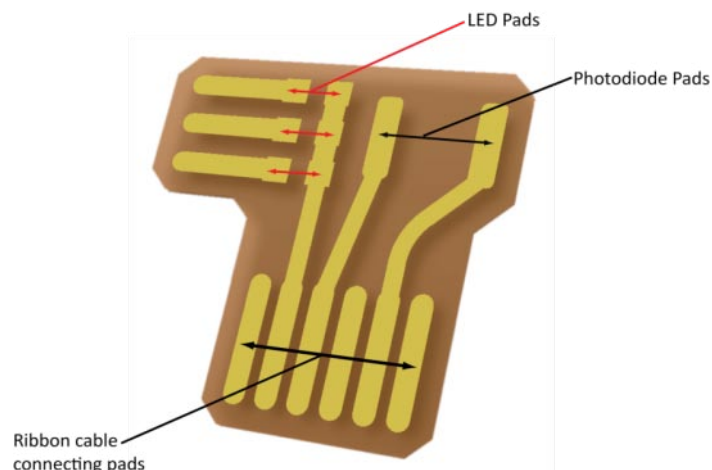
Three-dimensional concept of flexi-pcb layout for the reference sensor
